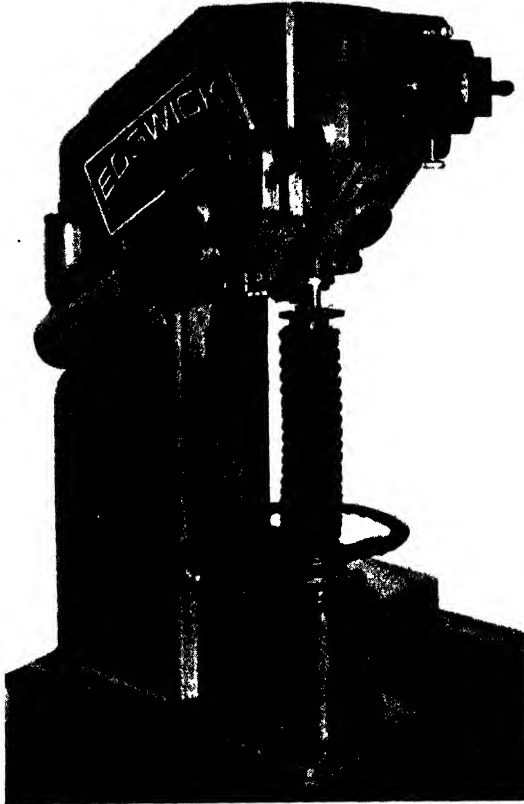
THE EDGWICK HARDNESS TESTING MACHINE
